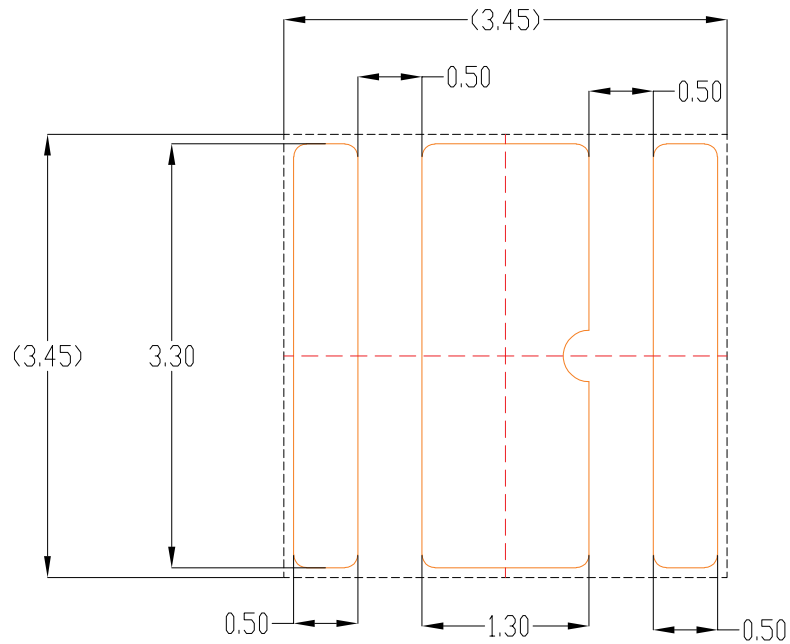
Recommended PCB solder pad layout for LUXEON HL2X.
